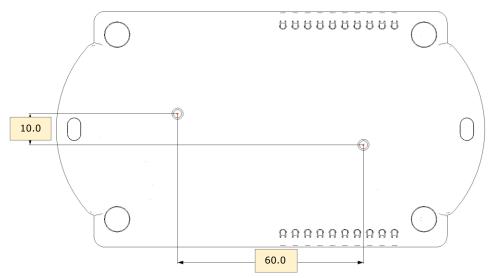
Modbus Isolated IO Controller Dimension - Bottom View
